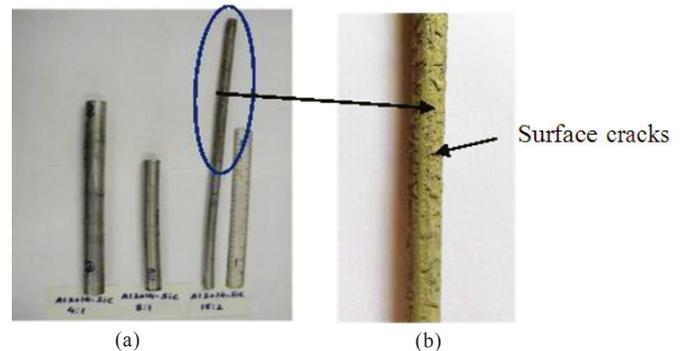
Closer view of rod extruded at 15:1. (a) Extruded samples and (b) Close view.
